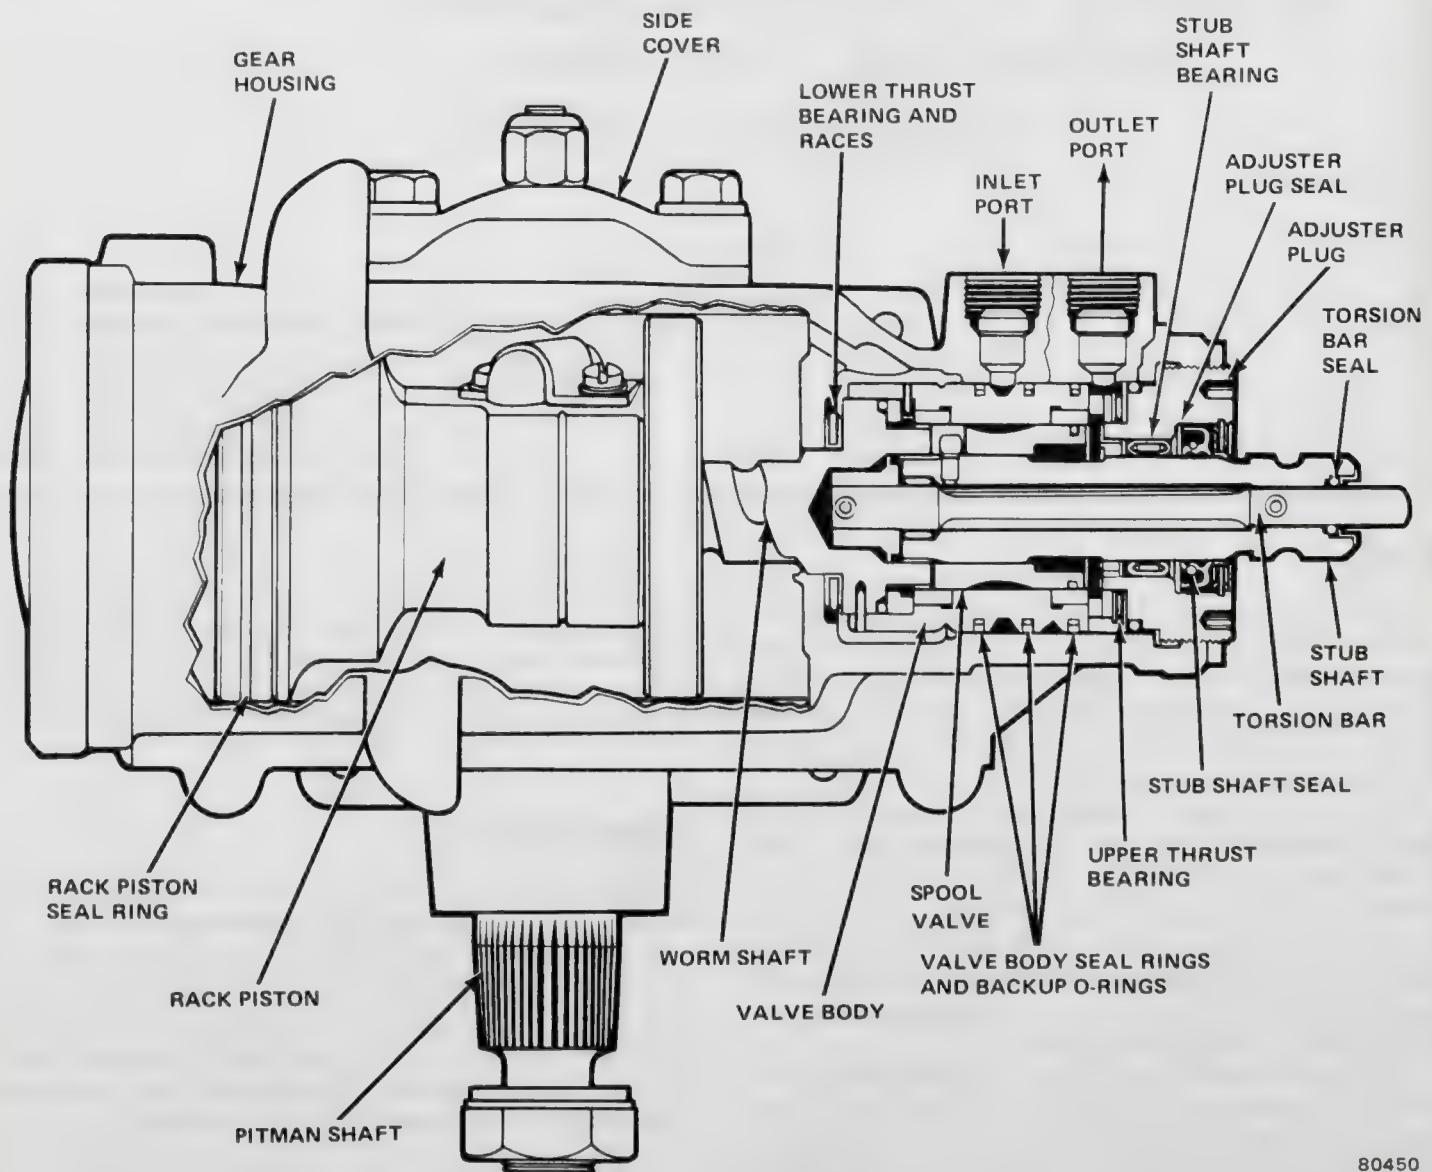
K-1 Power Steering Gear—Brembril-Concord-AMX-Matador
